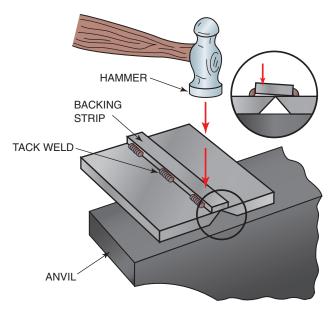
Using a hammer to align the backing strip and weld plates.
